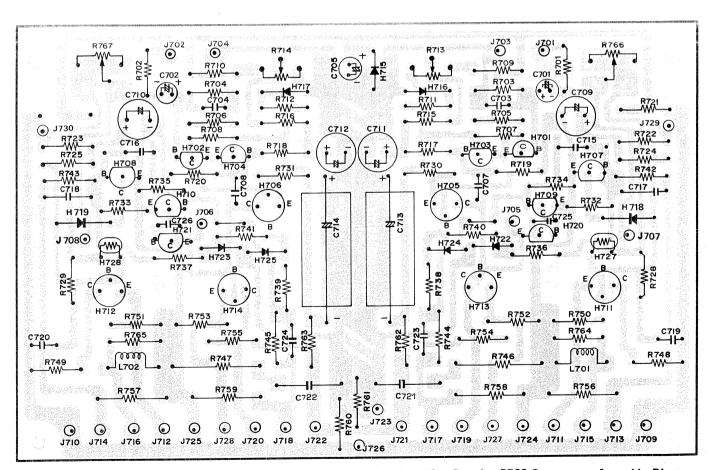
Main Amplifier Board - P700 Component Assembly Diagram
